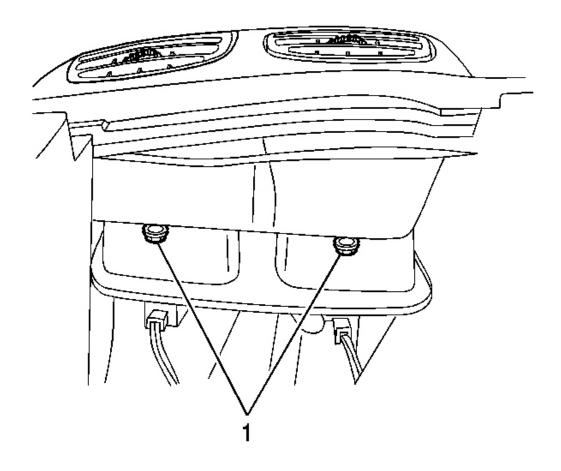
Removing/Installing Air Outlet Courtesy of GENERAL MOTORS CORP.
